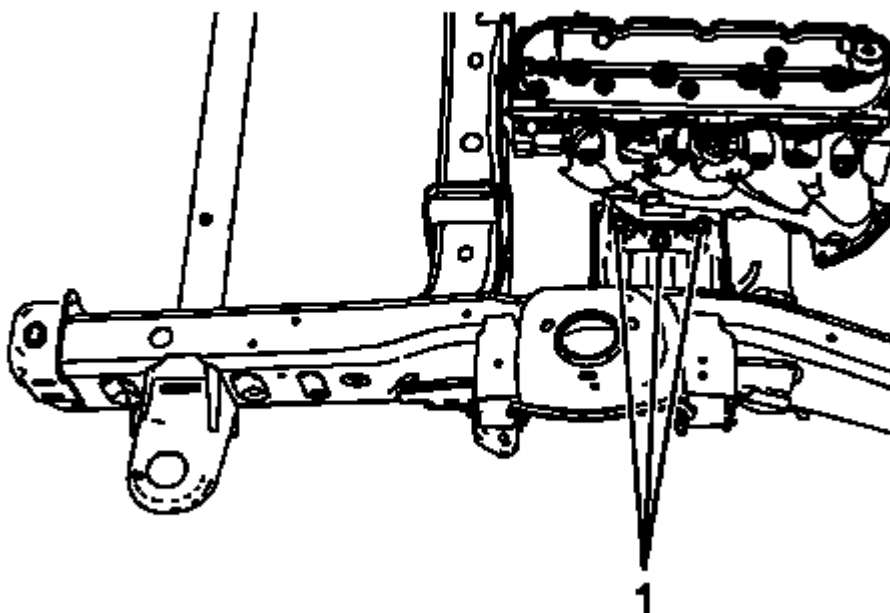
View Of Engine Mount To Frame Bolts
